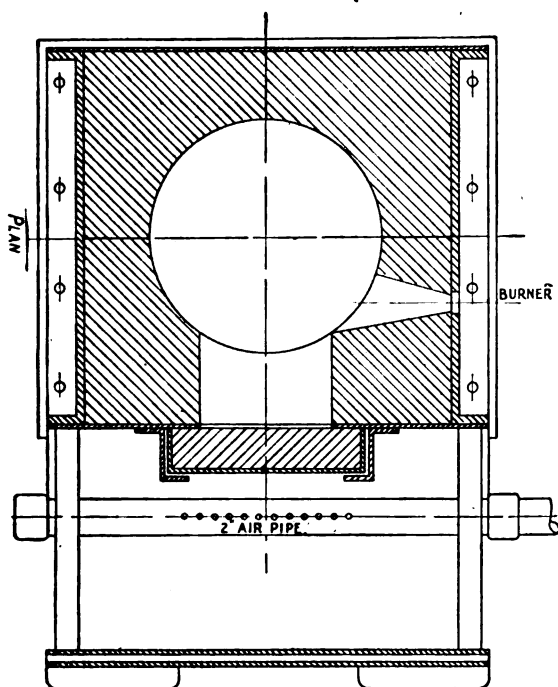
SECTIONAL VIEW OF "ROTOFLAM" TOOL-HARDENING FURNACE (Thompson's Patent).
